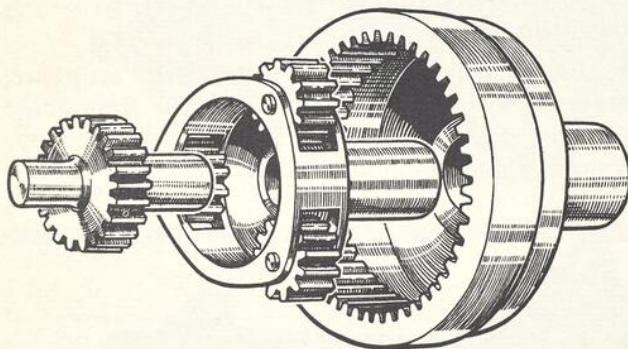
A—EXPLODED VIEW OF EPICYCLIC GEAR TRAIN
